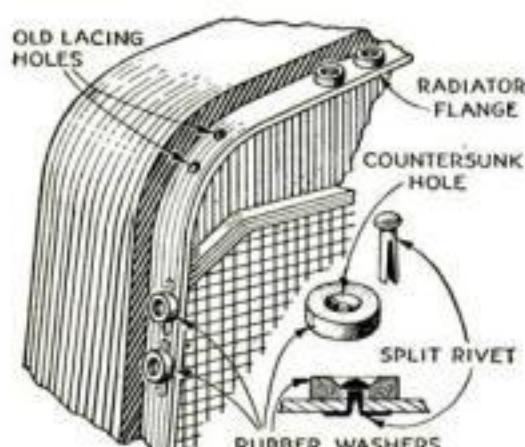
Washers cut from a rubber cork can be used to prevent the rattle caused by the radiator shell striking the hood
